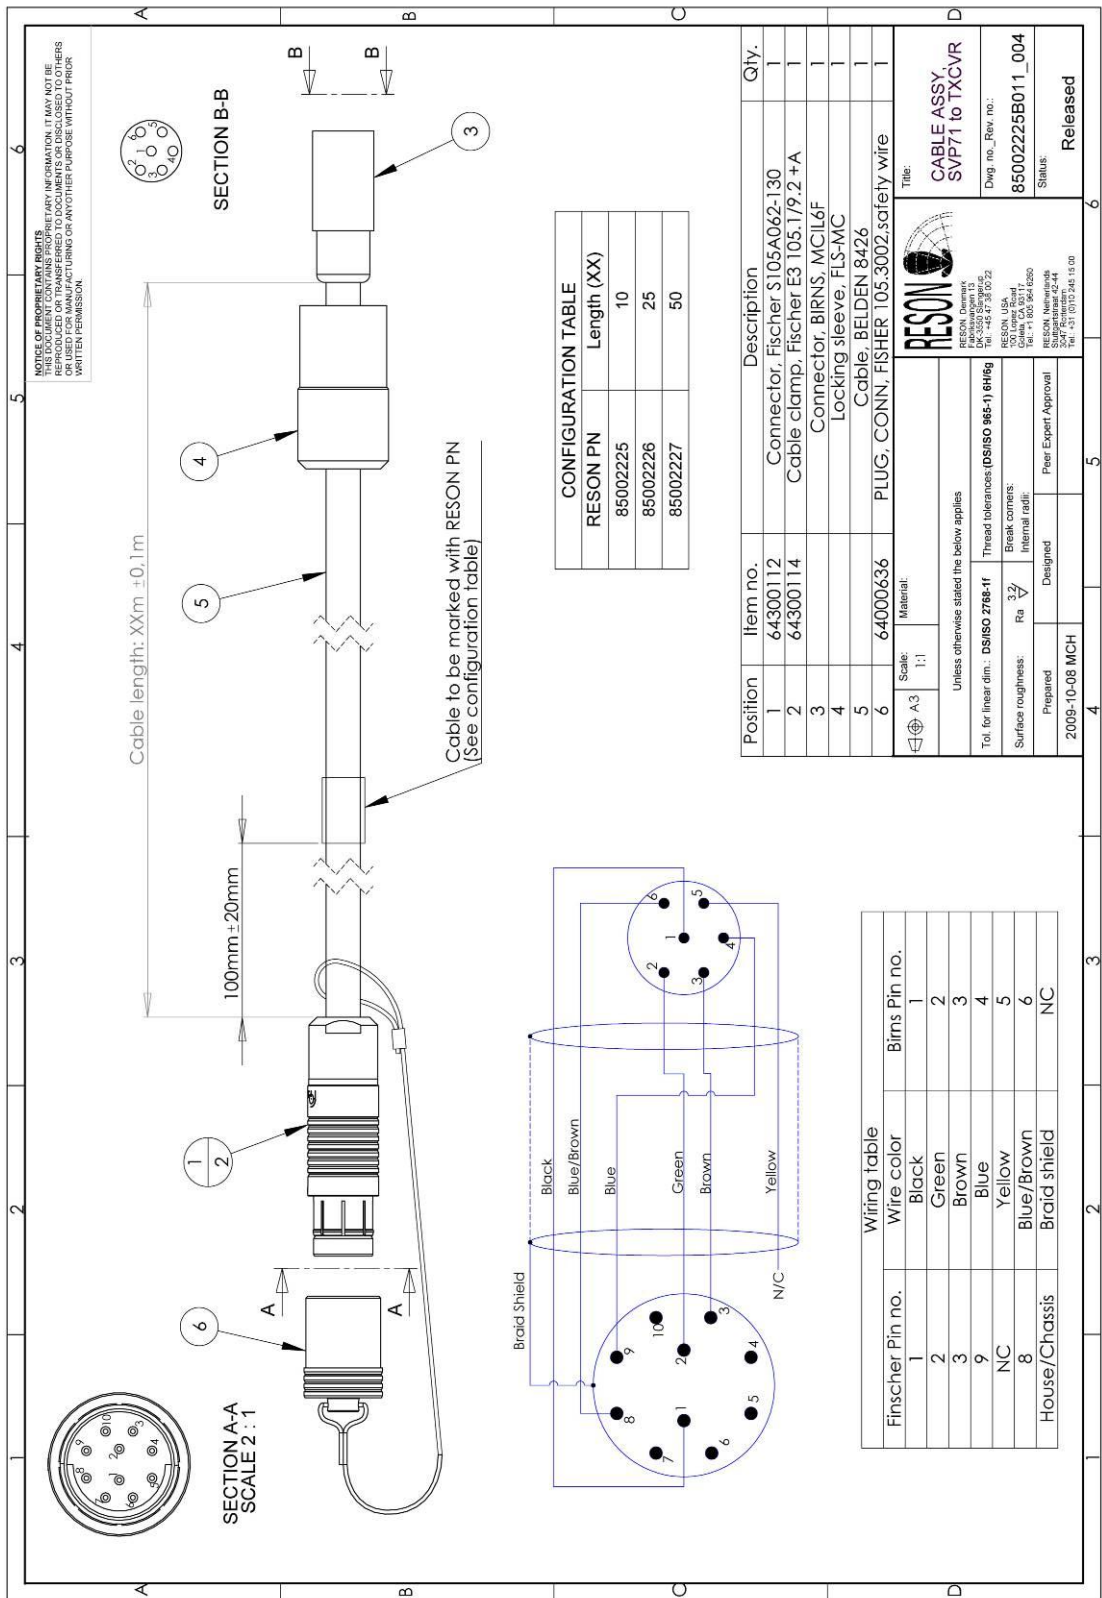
Cable Assembly, Transceiver to SVP 71 (optional)
